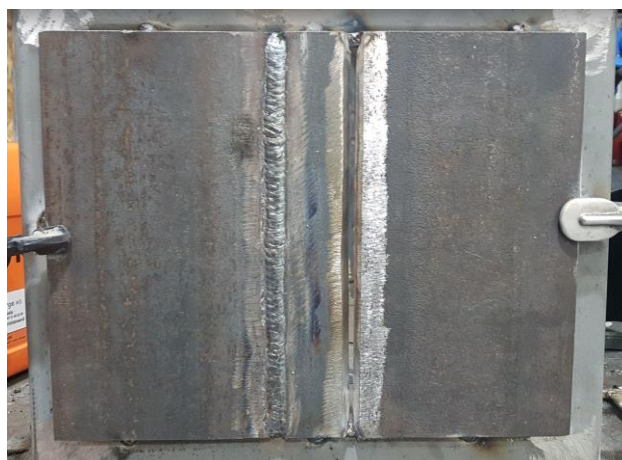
Initial test plate welded at Vest Norge Doors AS, Sandnes.
